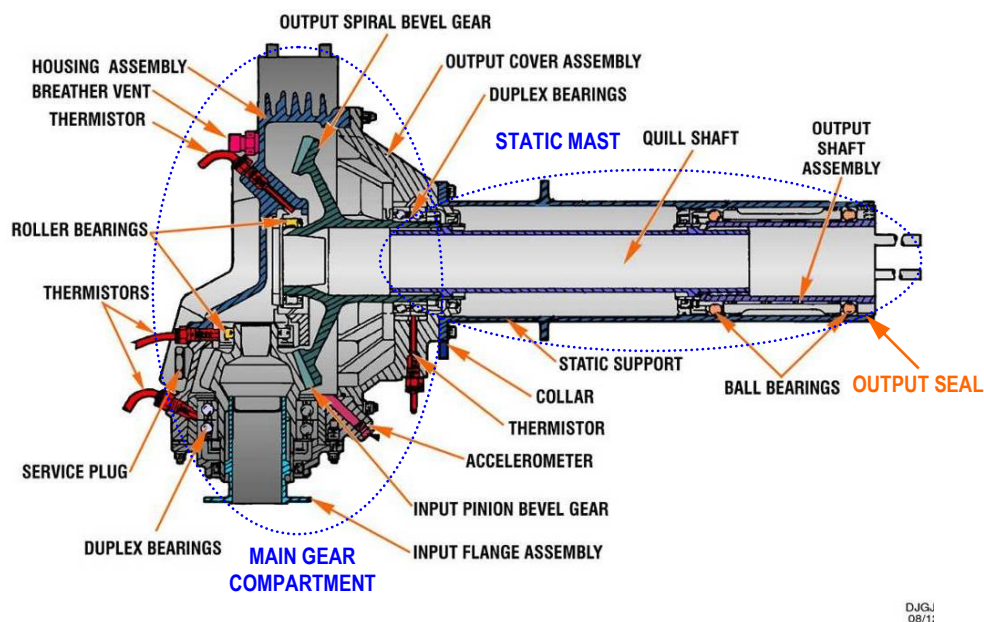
AH-64 Tail Rotor Gearbox cross section.
